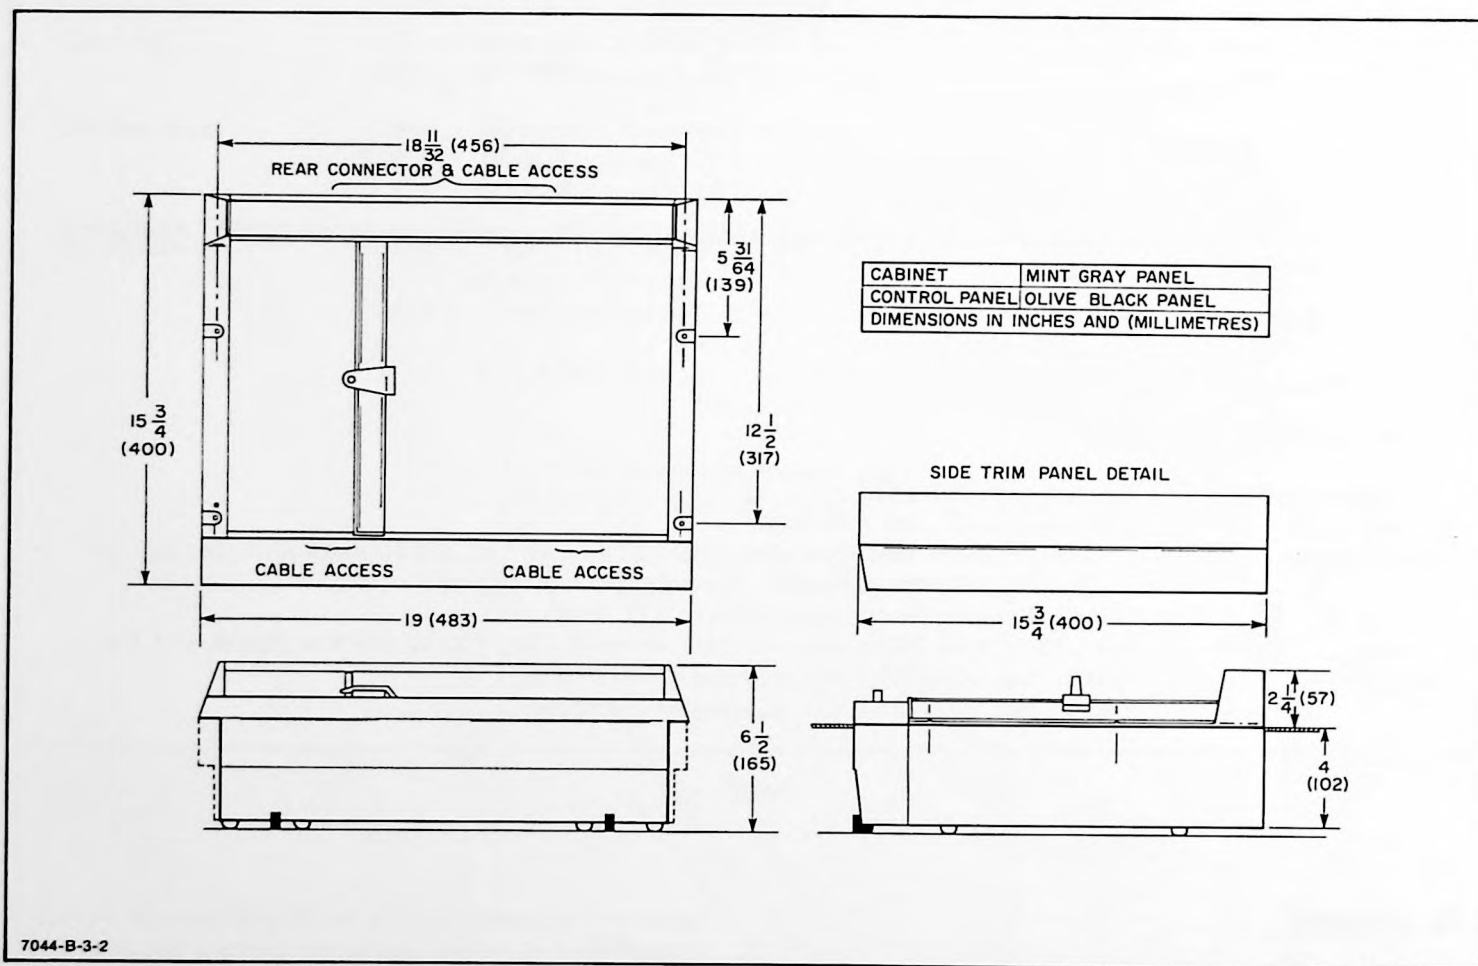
Model 7044B / 7045B Dimension Drawing
